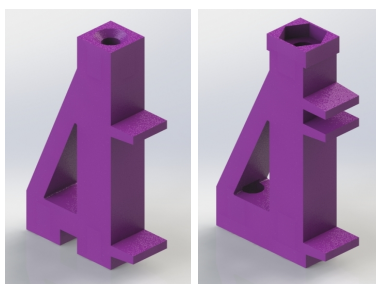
Renders of the old (left) and new (right) back PCB holders.
